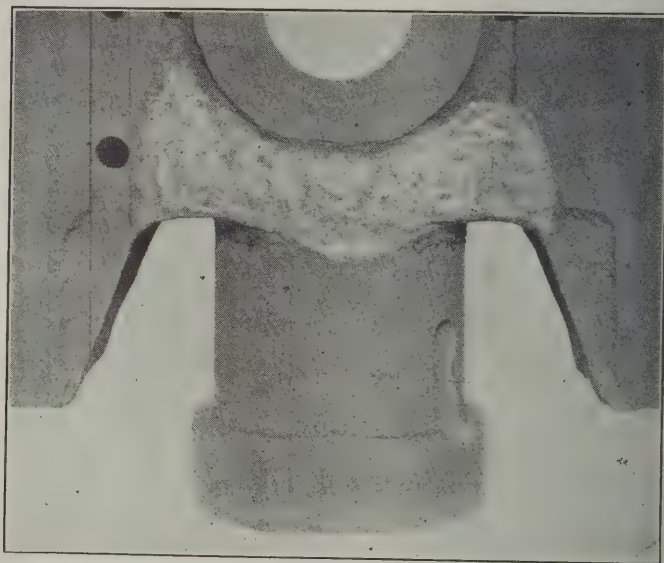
The Same Crosshead as Shown in Fig. 3 After being Welded with the Carbon Arc Process
